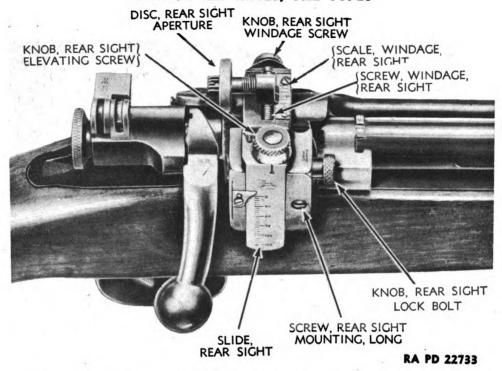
Rear Sight Assembly Mounted on U.S. Rifle, Cal. .22, M2 – Right Top View
